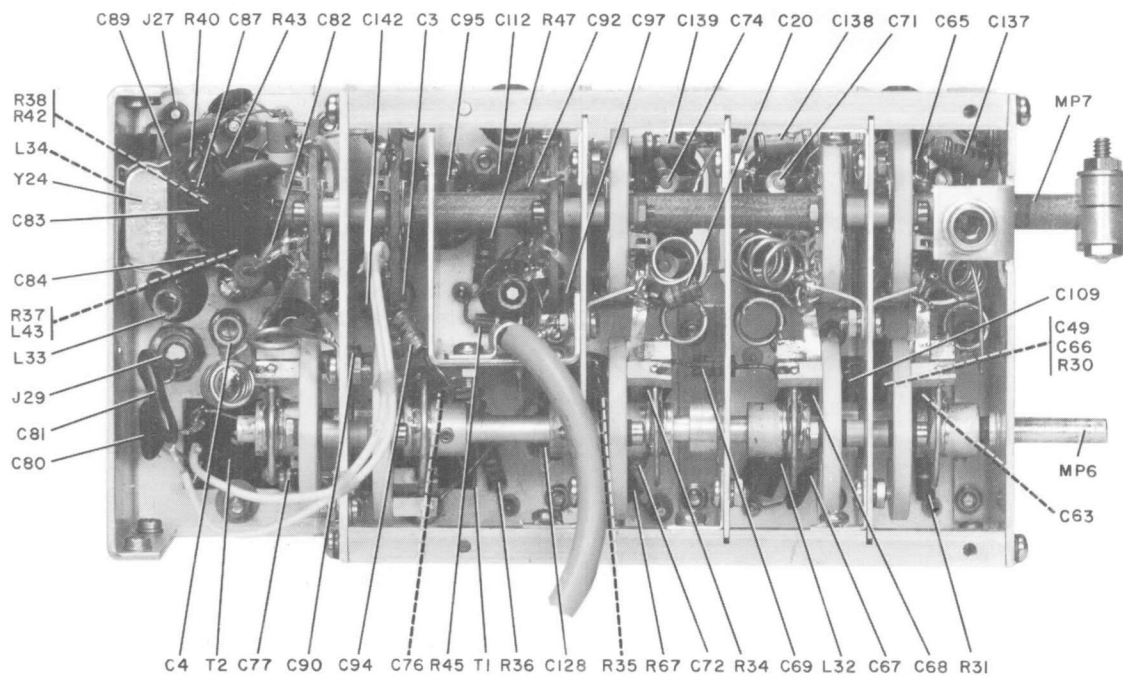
Receiver Subunit, Bottom View, Parts Identification
